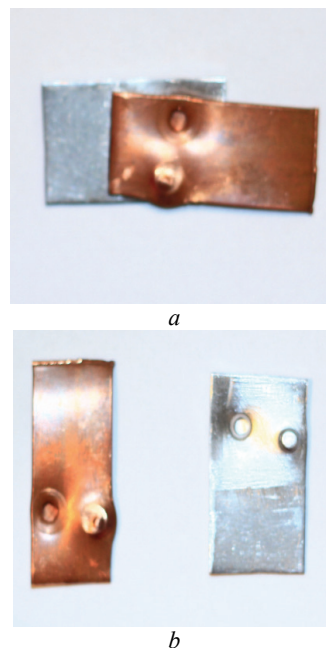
Research samples by cold welding: a) after joint plastic deformation aluminum – copper; b) gap zone
